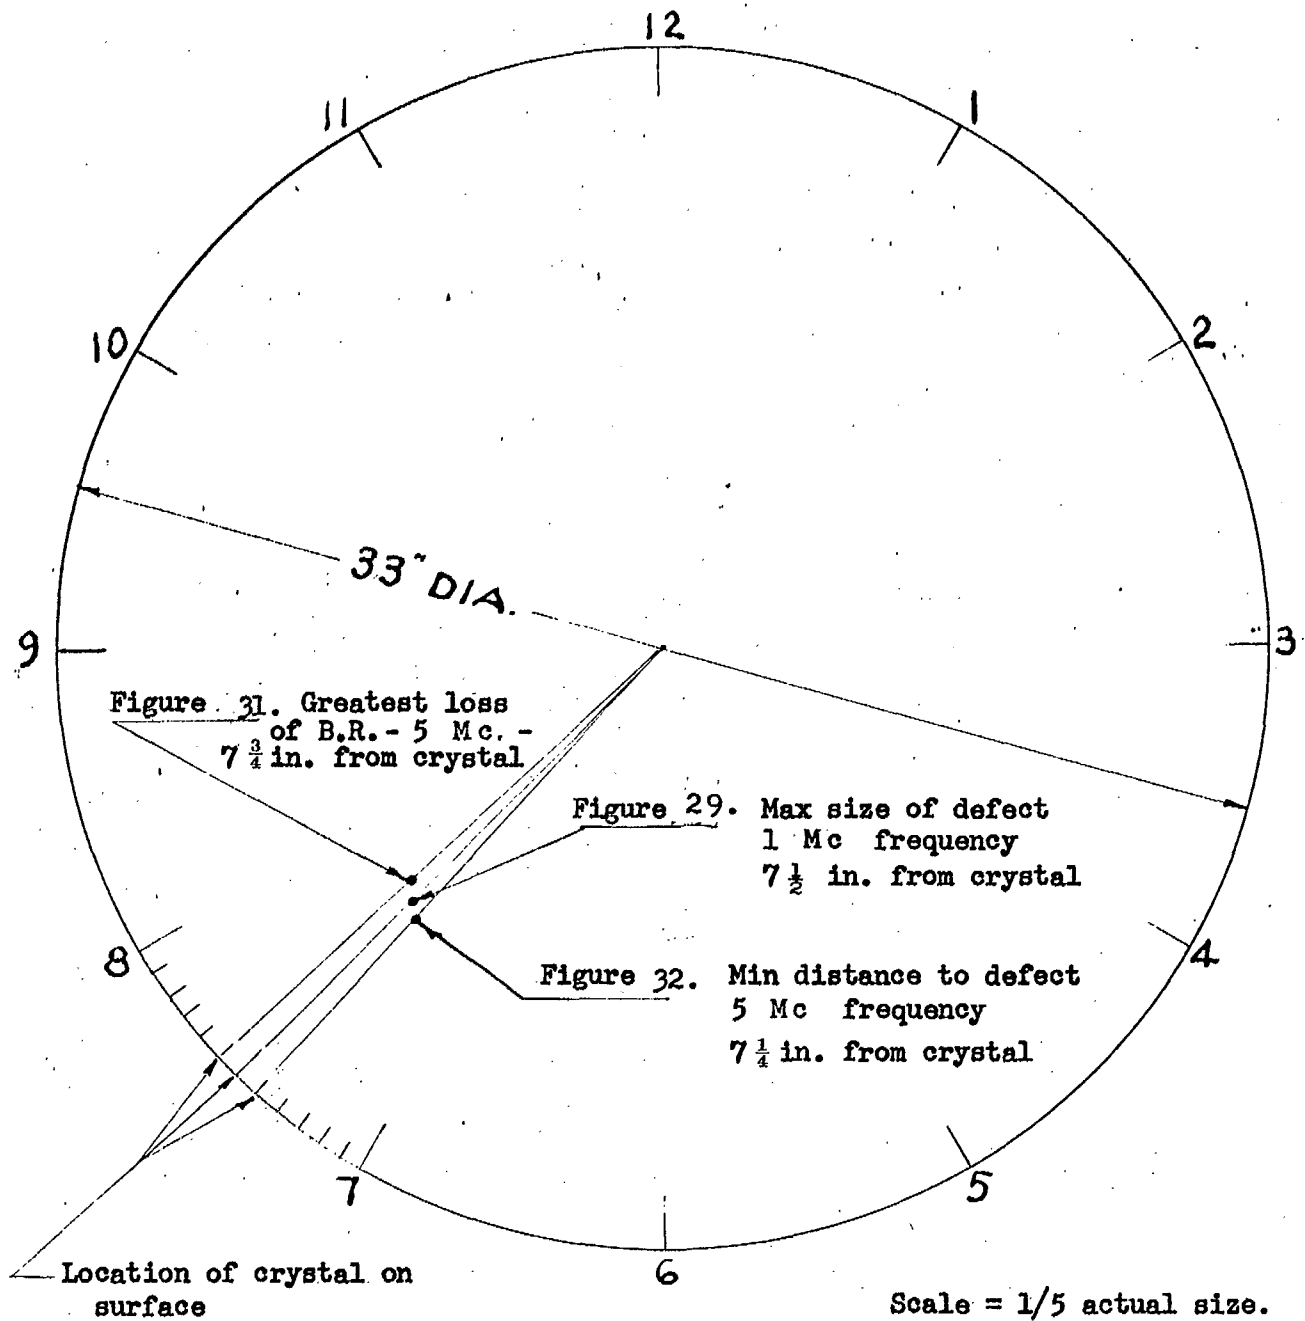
Cross-section of rotor, located $16\frac{1}{2}$ in. from top end of 33 in. diam.
